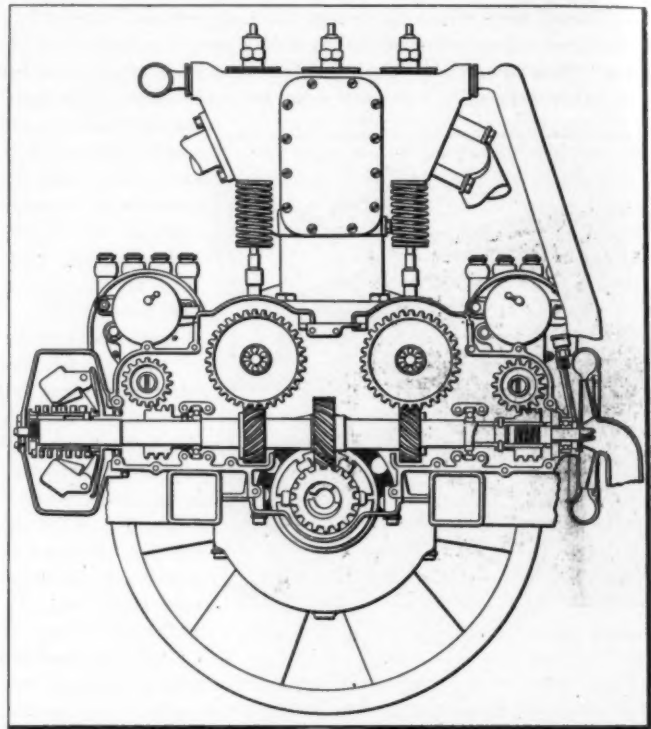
Spiral gear system used on the Moore motor for driving the camshafts and magnetos
